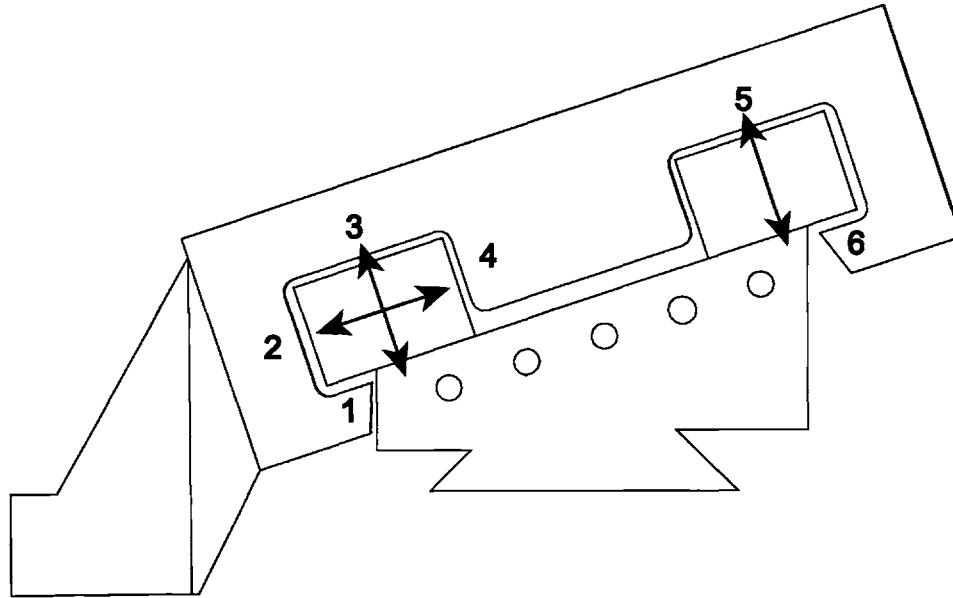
Prototype 2: side view showing kinematically constrained catamaran bearing
